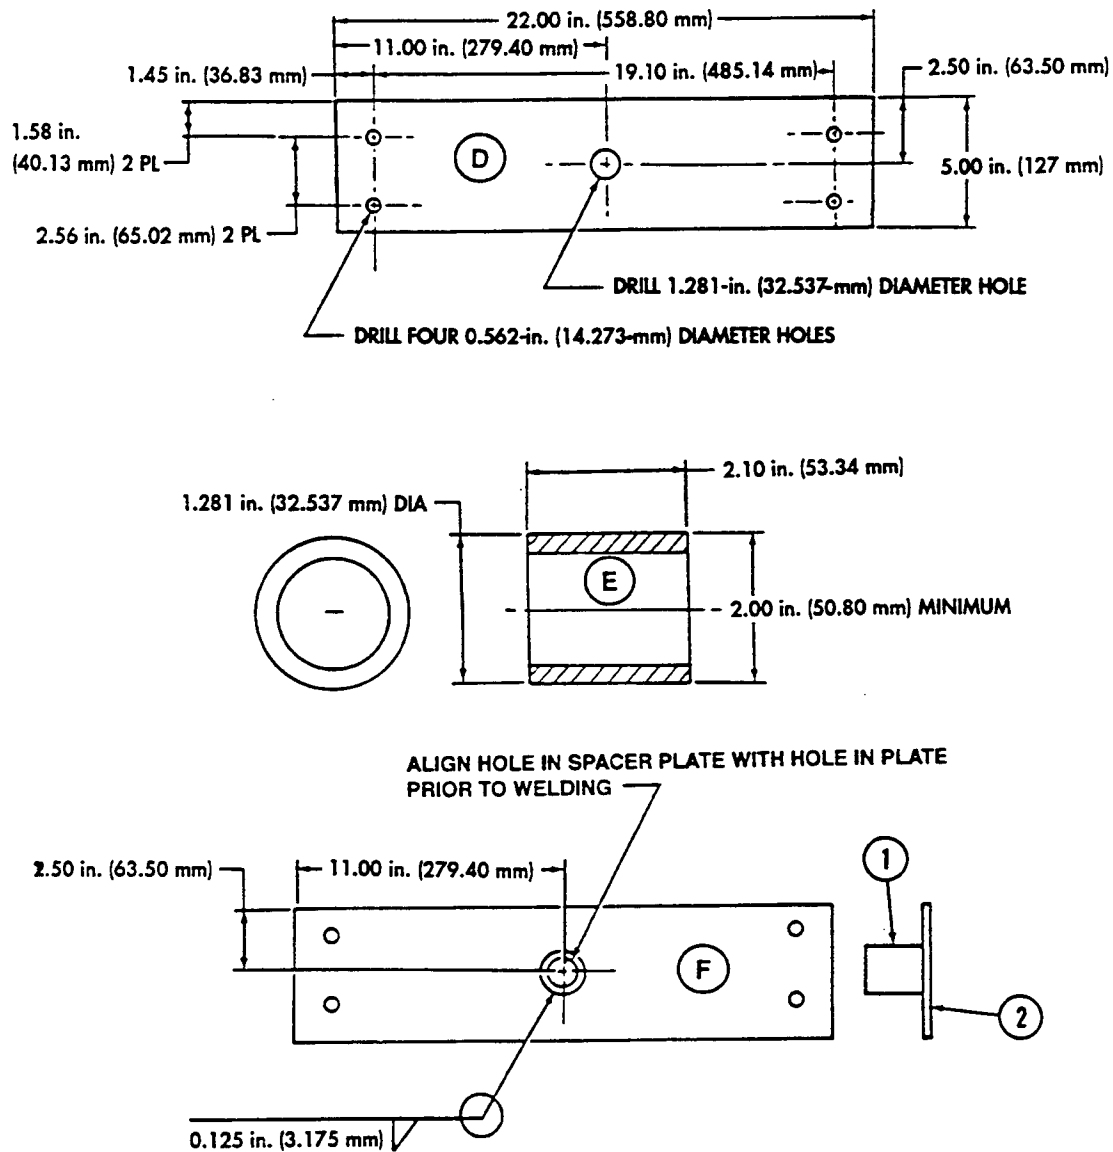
Front Bumper Tow Pintle Plate Assembly (Back), 5992406.
